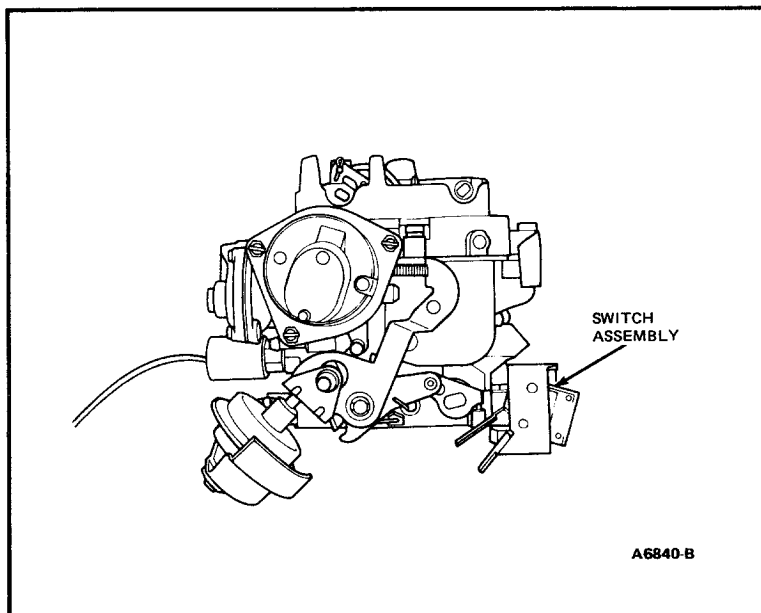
Typical Carburetor Throttle Position Switch, 1.9L-2V
